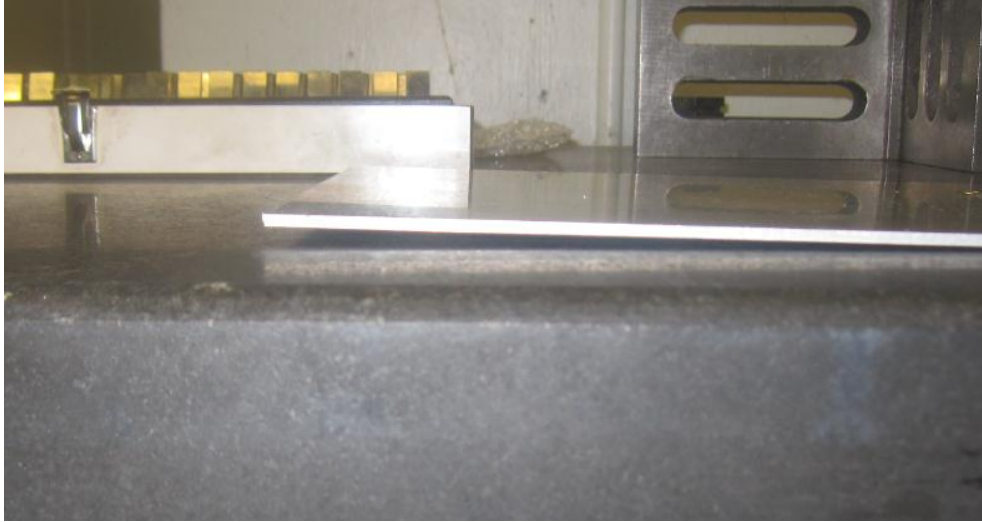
Real deflection of aluminum sheet after pocket milling
